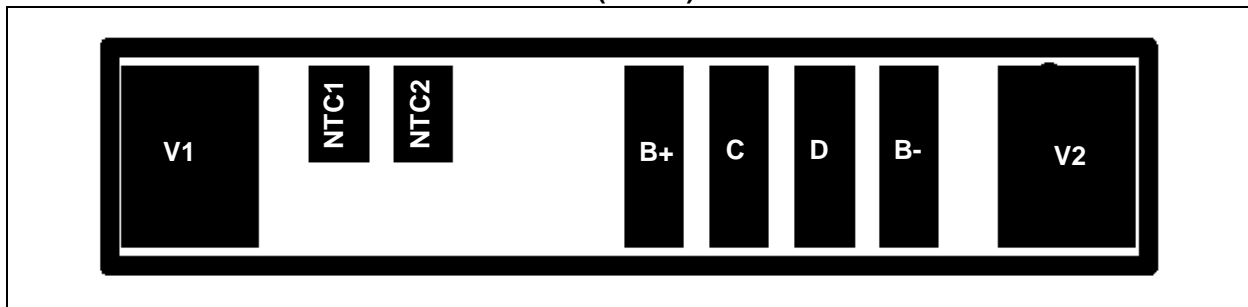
PS7052 BOARD ASSEMBLY (SIDE 1)
